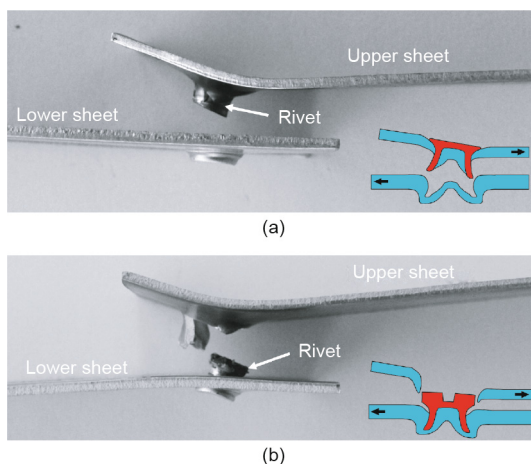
Lap-shear failure modes of the SPR and the F-SPR joints. (a) Rivet pull-out of the SPR joint and (b) upper sheet fracture of the F-SPR\_3 ( $D_{switch} = 3.0$  mm) joint.
